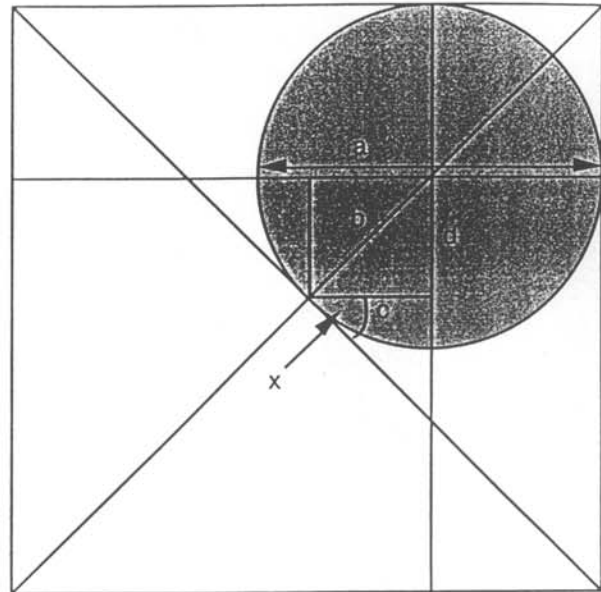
A cross-sectional view through one side of an o-ring, depicting the dimensions required to compute the area under an o-ring seal.
